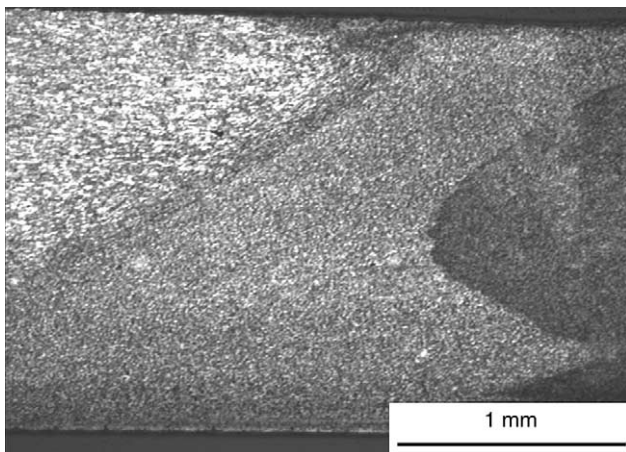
Cross section of the welded specimen: particular of the nugget zone, TMAZ and base material interface.
